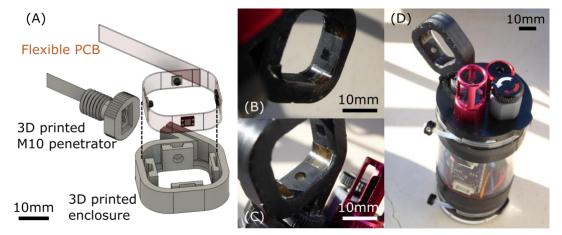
(A) CAD illustration of the GLI-2 sensor, with the flexible PCB hosting the two IR LEDs and the two photodiodes, the 3D printed enclosure and a 3D printed M10 penetrator that makes the sensor compatible with Blue Robotics waterproof enclosures. (B) and (C) Close-up pictures of a photodiode and a LED optical port respectively, after the PMDS overmolding step, to illustrate the good transparency and optical properties obtained with our method. (D) Implementation for in-situ deployment, with the electronics and LiPo battery protected behind a Blue Robotics 2-inch diameter enclosure, showing the GLi-2 sensor head as well as additional pressure (depth) and temperature sensors.
